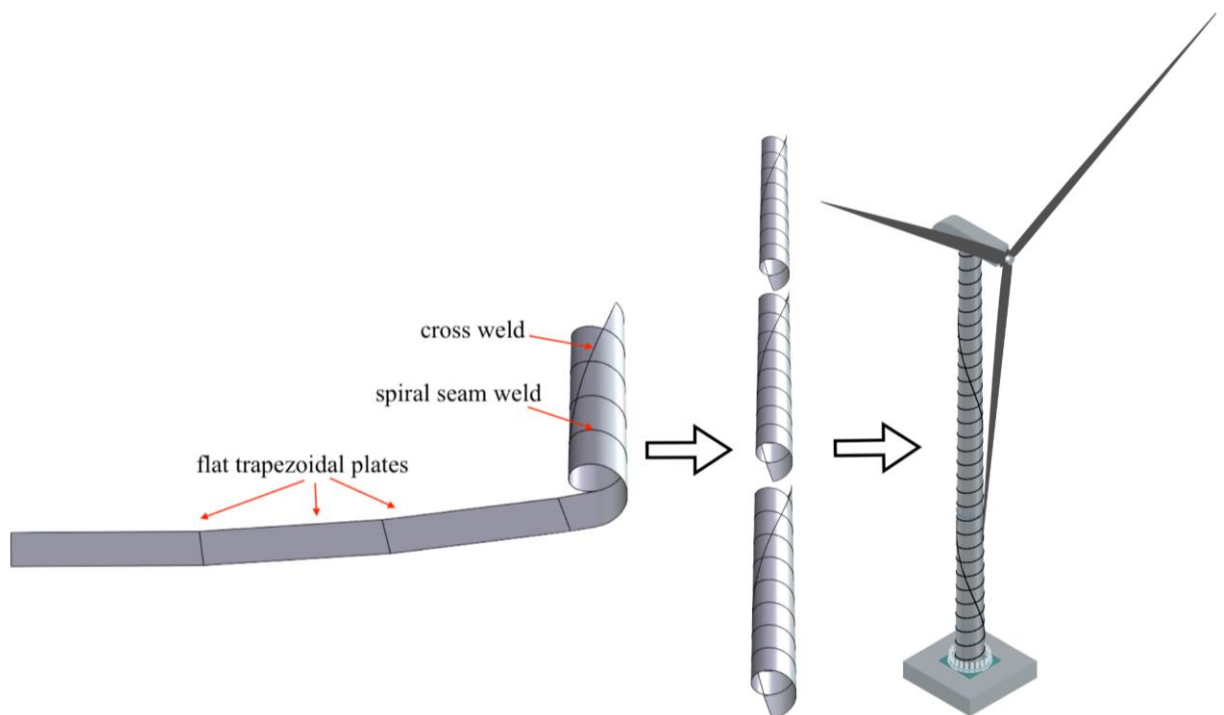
Schematic of the spiral welding procedure to manufacture tapered tubes then these tubes are cut and welded together to build wind turbine tower.
